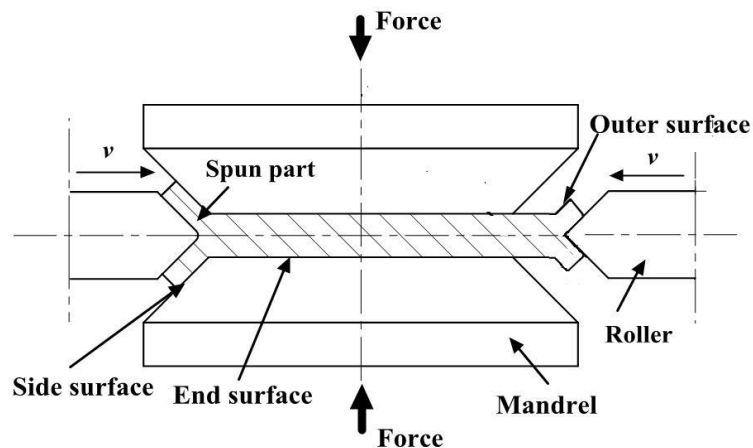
Illustration of the contact between the workpiece and mandrels.
